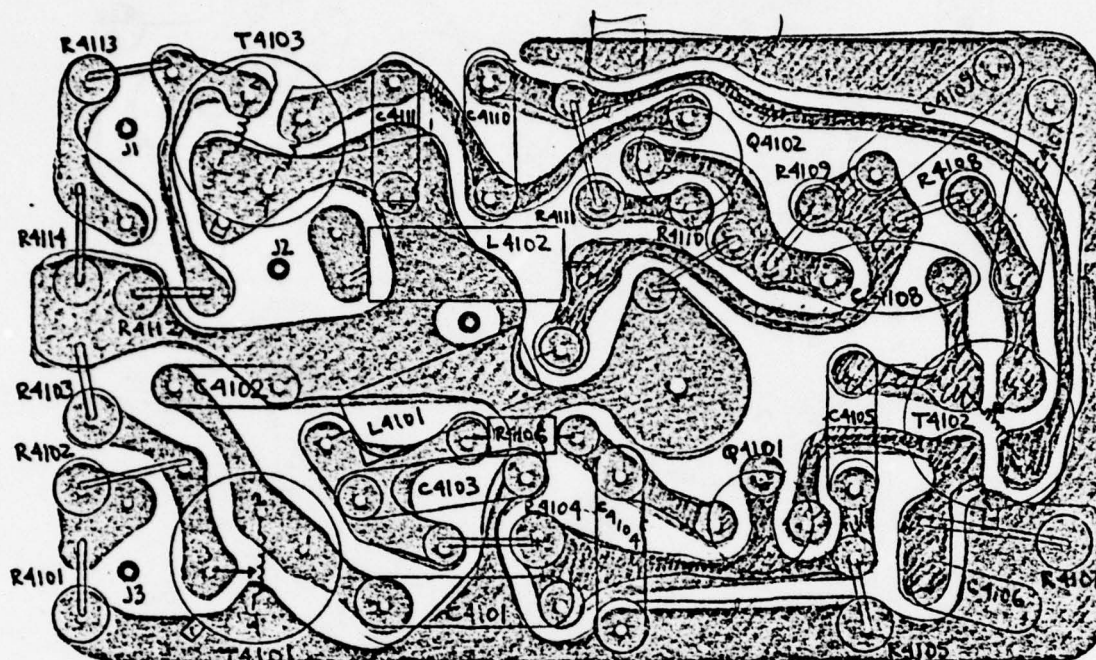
P.C. BOARD LAYOUT FOR THE A4100A RECEIVER FIRST AND SECOND IF AMPLIFIERS ASSEMBLY
